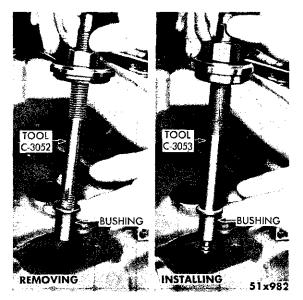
Removing and Installing the Distributor Drive Shaft Bushing
